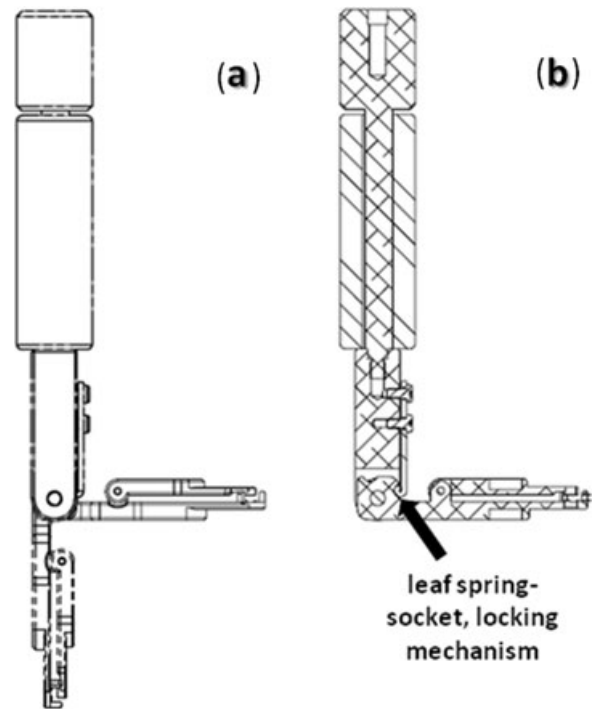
Drawings of the CEVS tweezers. (a) Tweezers side-view showing two optional working modes; (b) tweezers cross-section showing locking mechanism.
